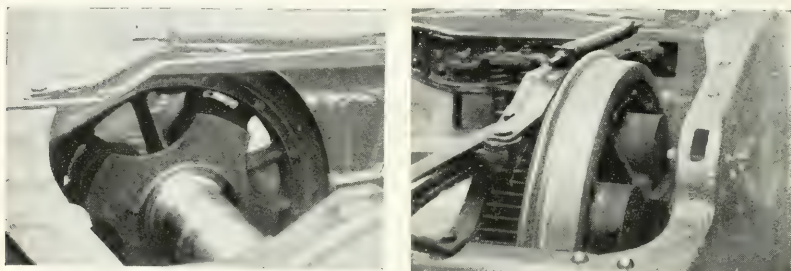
DETAIL VIEW OF QUILL IN PLACE BEFORE MOTOR IS MOUNTED
